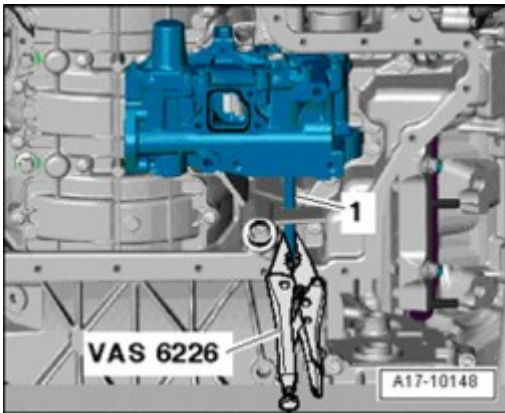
Pressing Back Drive Shaft For Oil Pump Against Spring Force And Clamping Tightly Using Long-Nose Gripping Pliers VAS 6226
